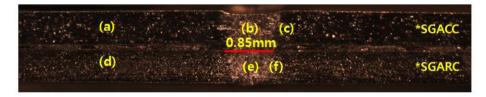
Cross section of laser stitch welded joints
